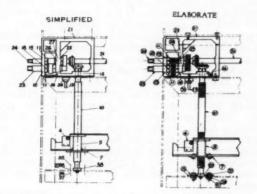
Omit detail of parts on assembly drawings the function of which is to simply show the part location.
